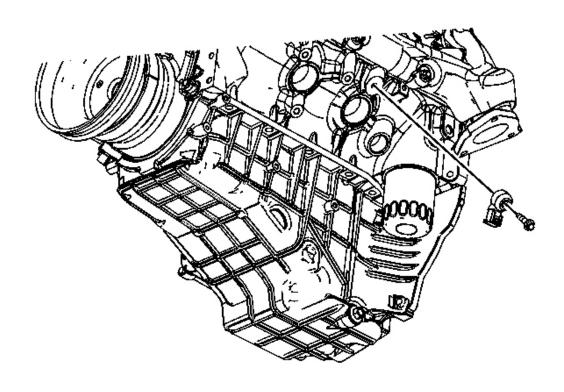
View Of Knock Sensor & Bolt Courtesy of GENERAL MOTORS CORP.
